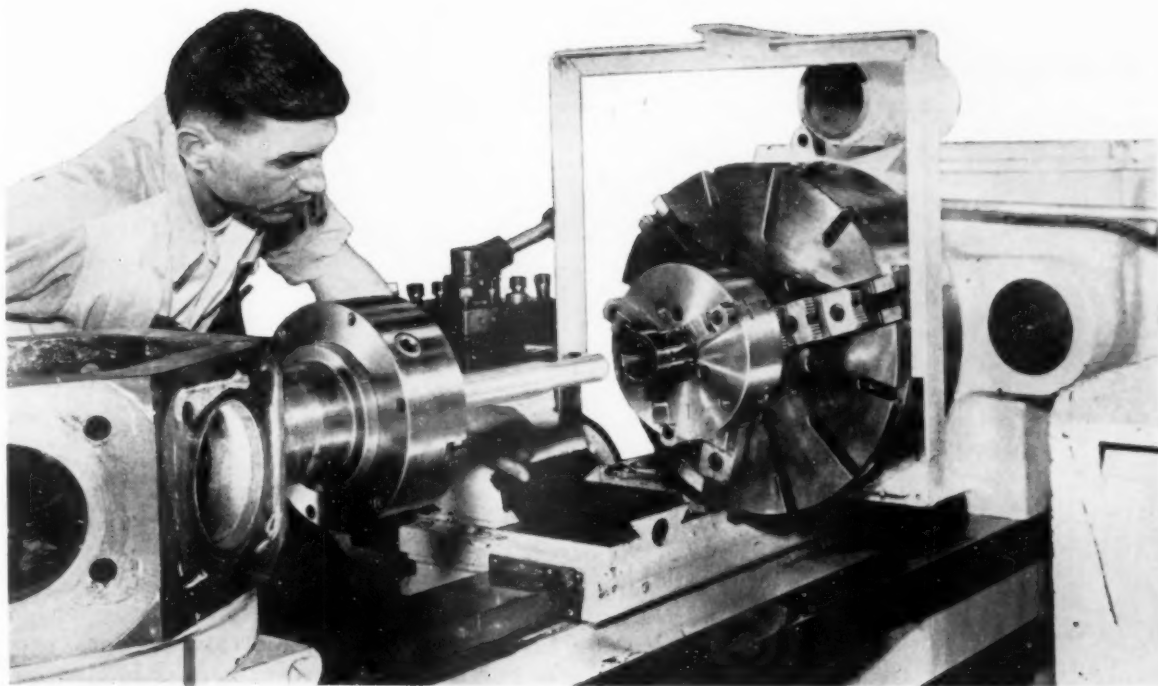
Latest tube swaging operation employs helically fluted die rotated in chuck of turret lathe as tubular piece-part is advanced by turret.
